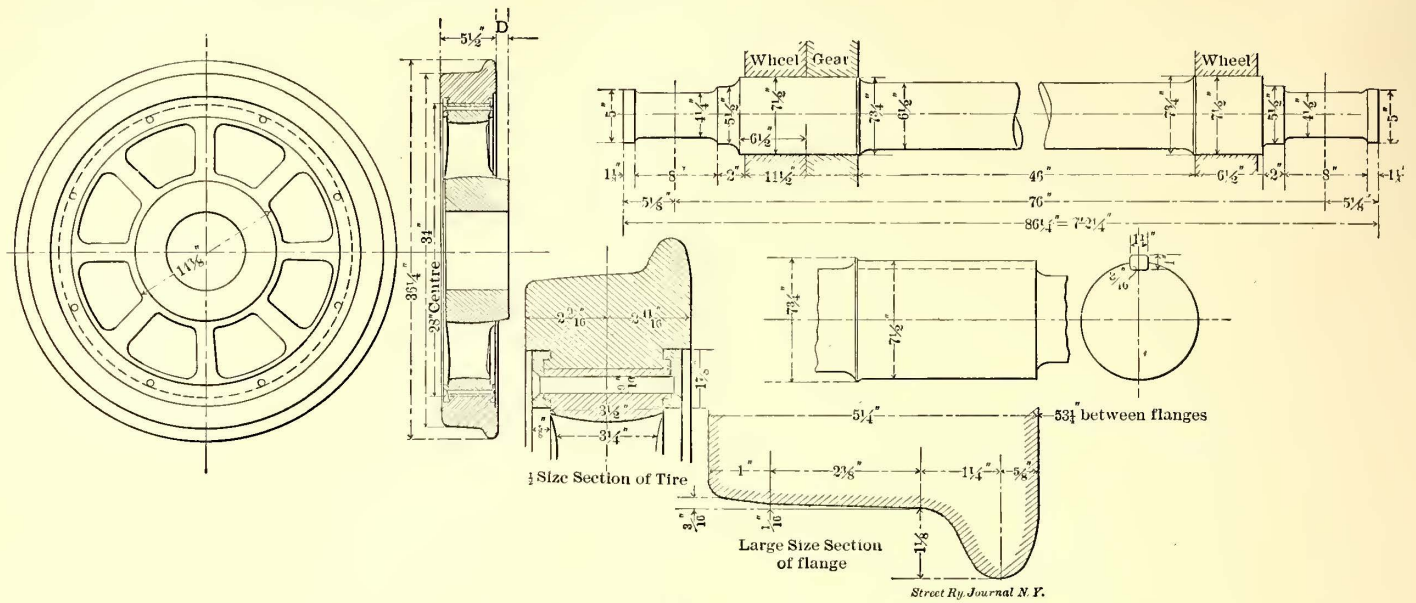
DETAIL OF STEEL-TIRED MOTOR WHEEL, BOSTON ELEVATED RAILWAY CARS
